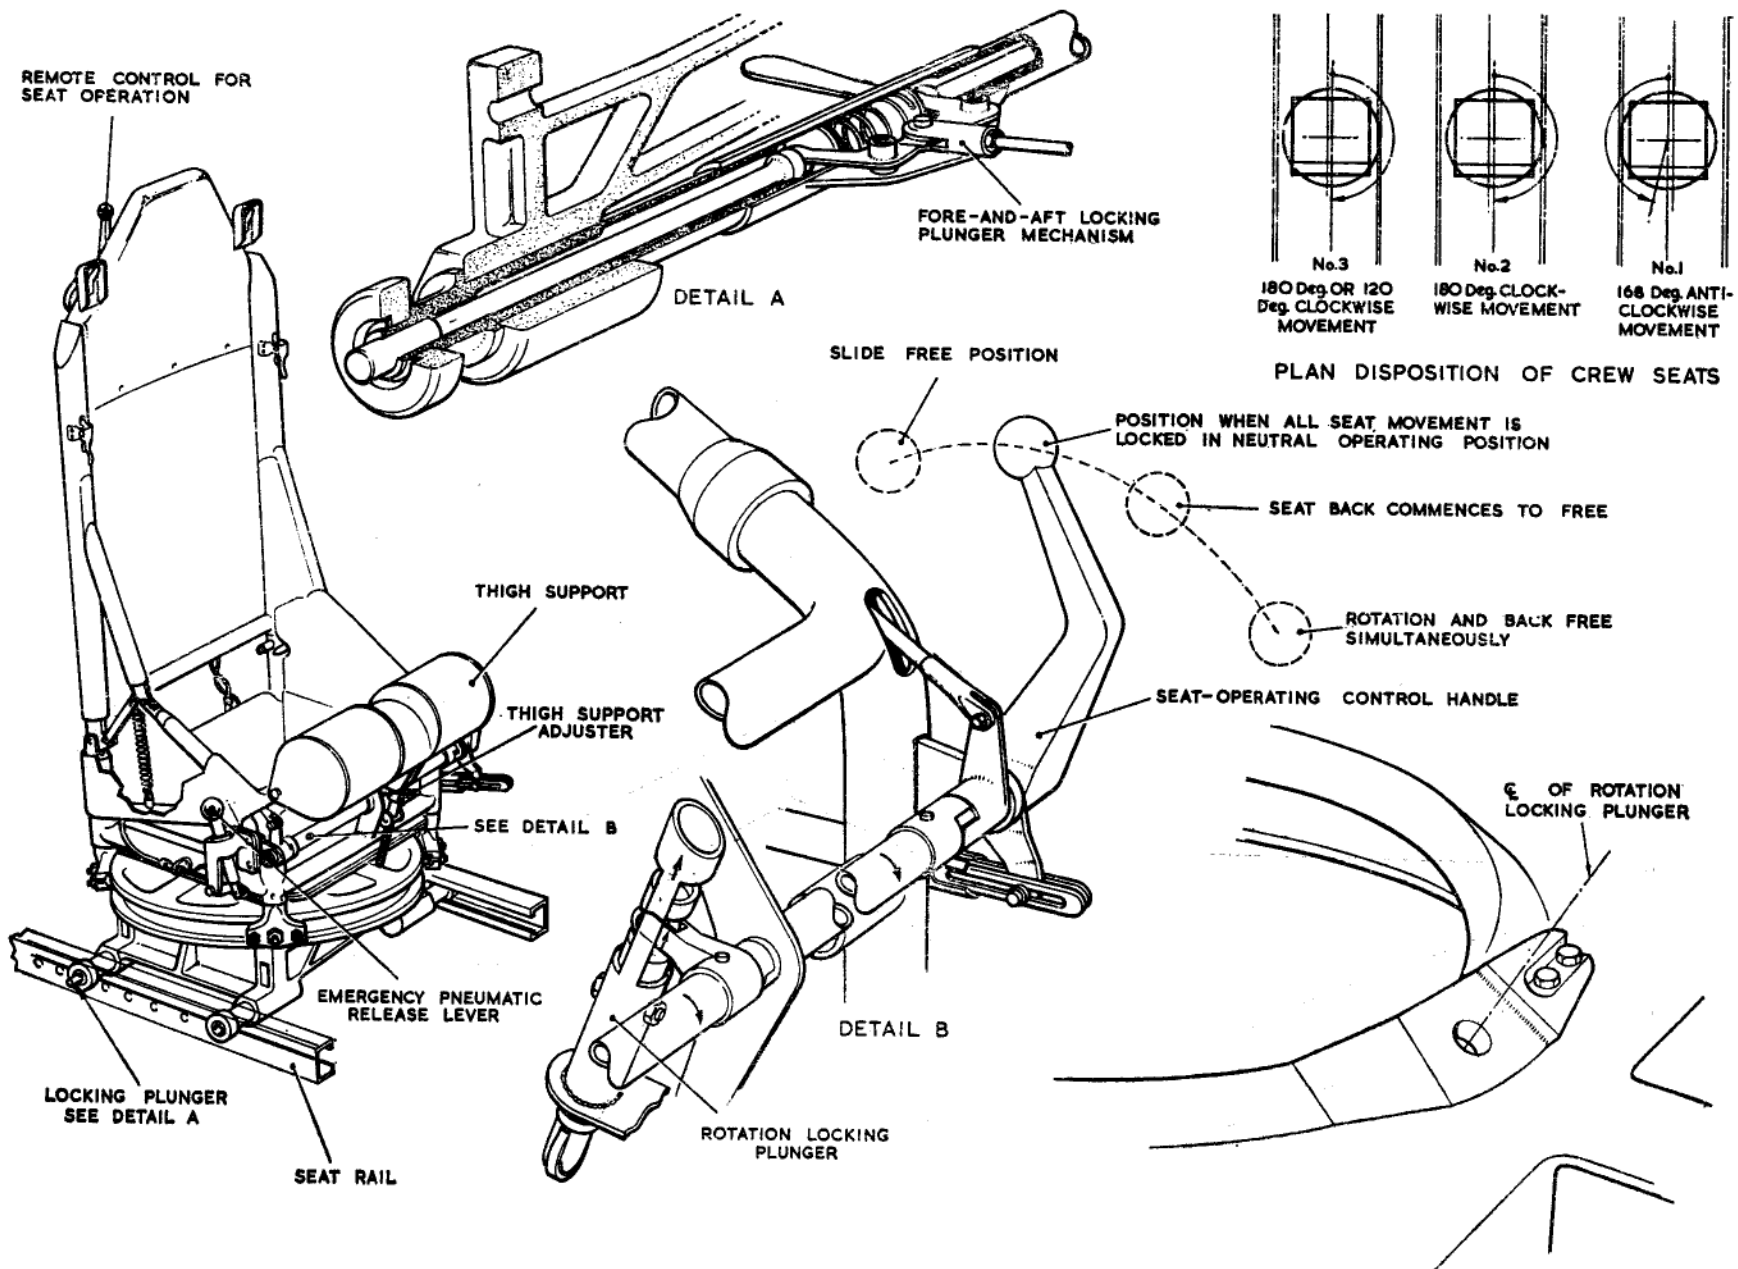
B. Crew seat, universal swivel type (Mod. 3193)
